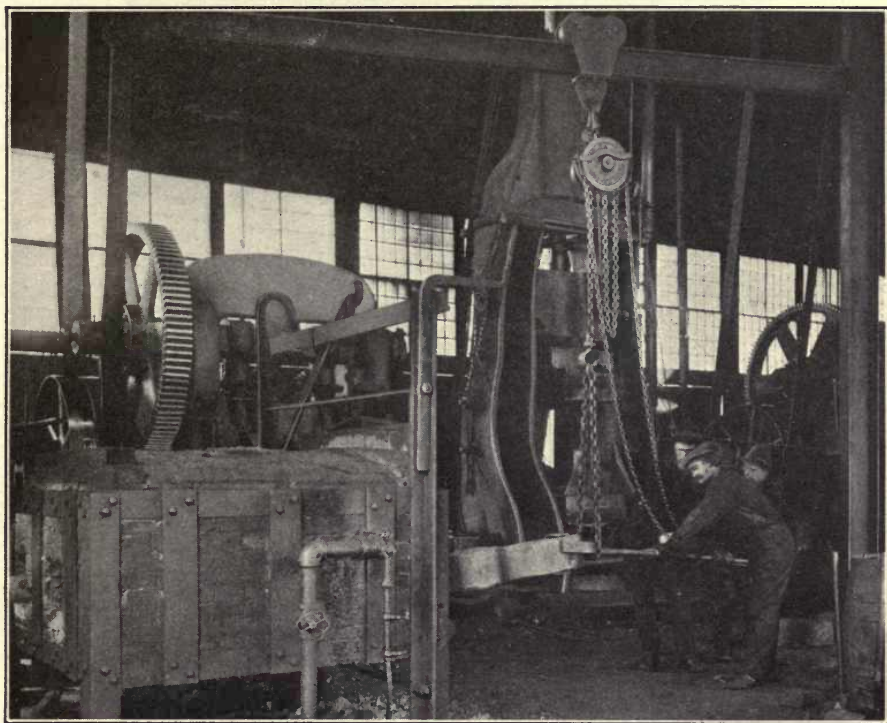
Taking crank-shaft from furnace to hammer for first operation.
